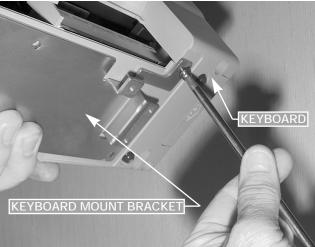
Attach Keyboard to Pole Mount Assembly
